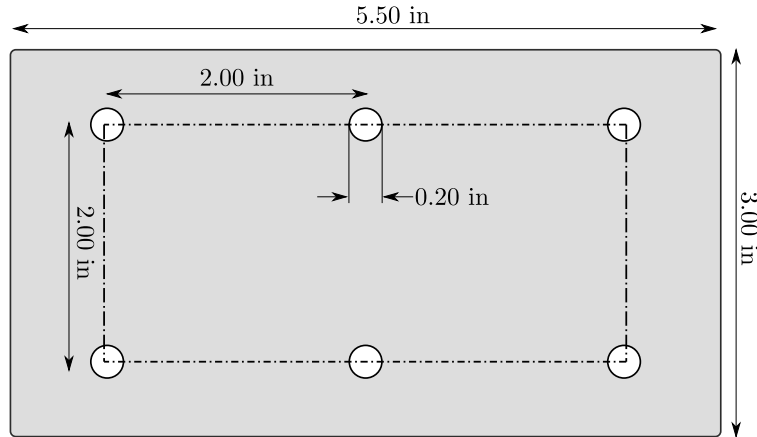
Hole spacing for pedestal to table screws. All dimensions are shown in inches
